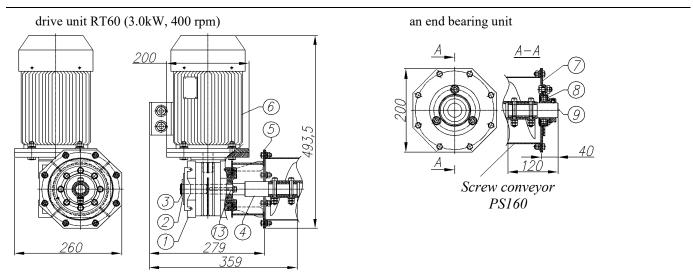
PS160-N3.0/400- a screw conveyor of -160 mm - drive power P=3.0 kW, output rotational speed of 400 rpm
